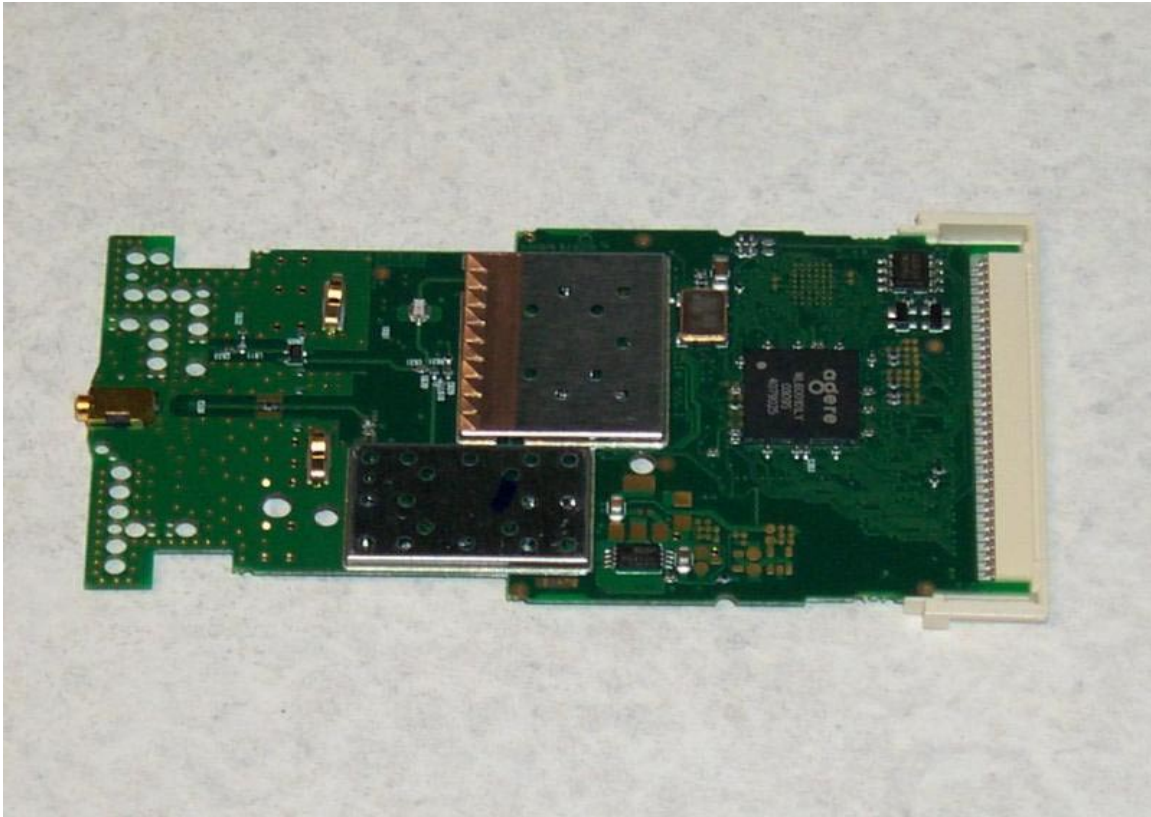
PRA-0005 PCB Bottom with Internal RF Shielding
